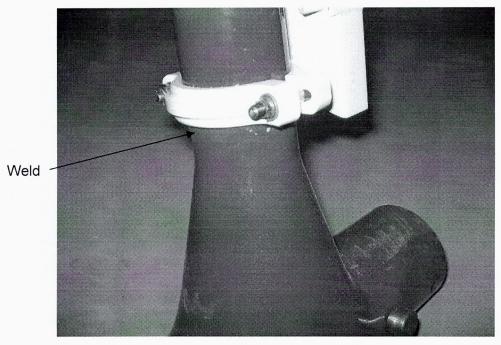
Aft Beam Installation, Bottom Clamp
